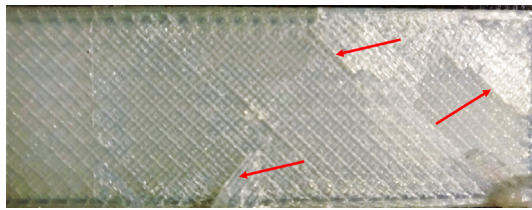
Fractured surfaces after the DCB test for a PA12 specimen (arrows evidence pull out layer).
